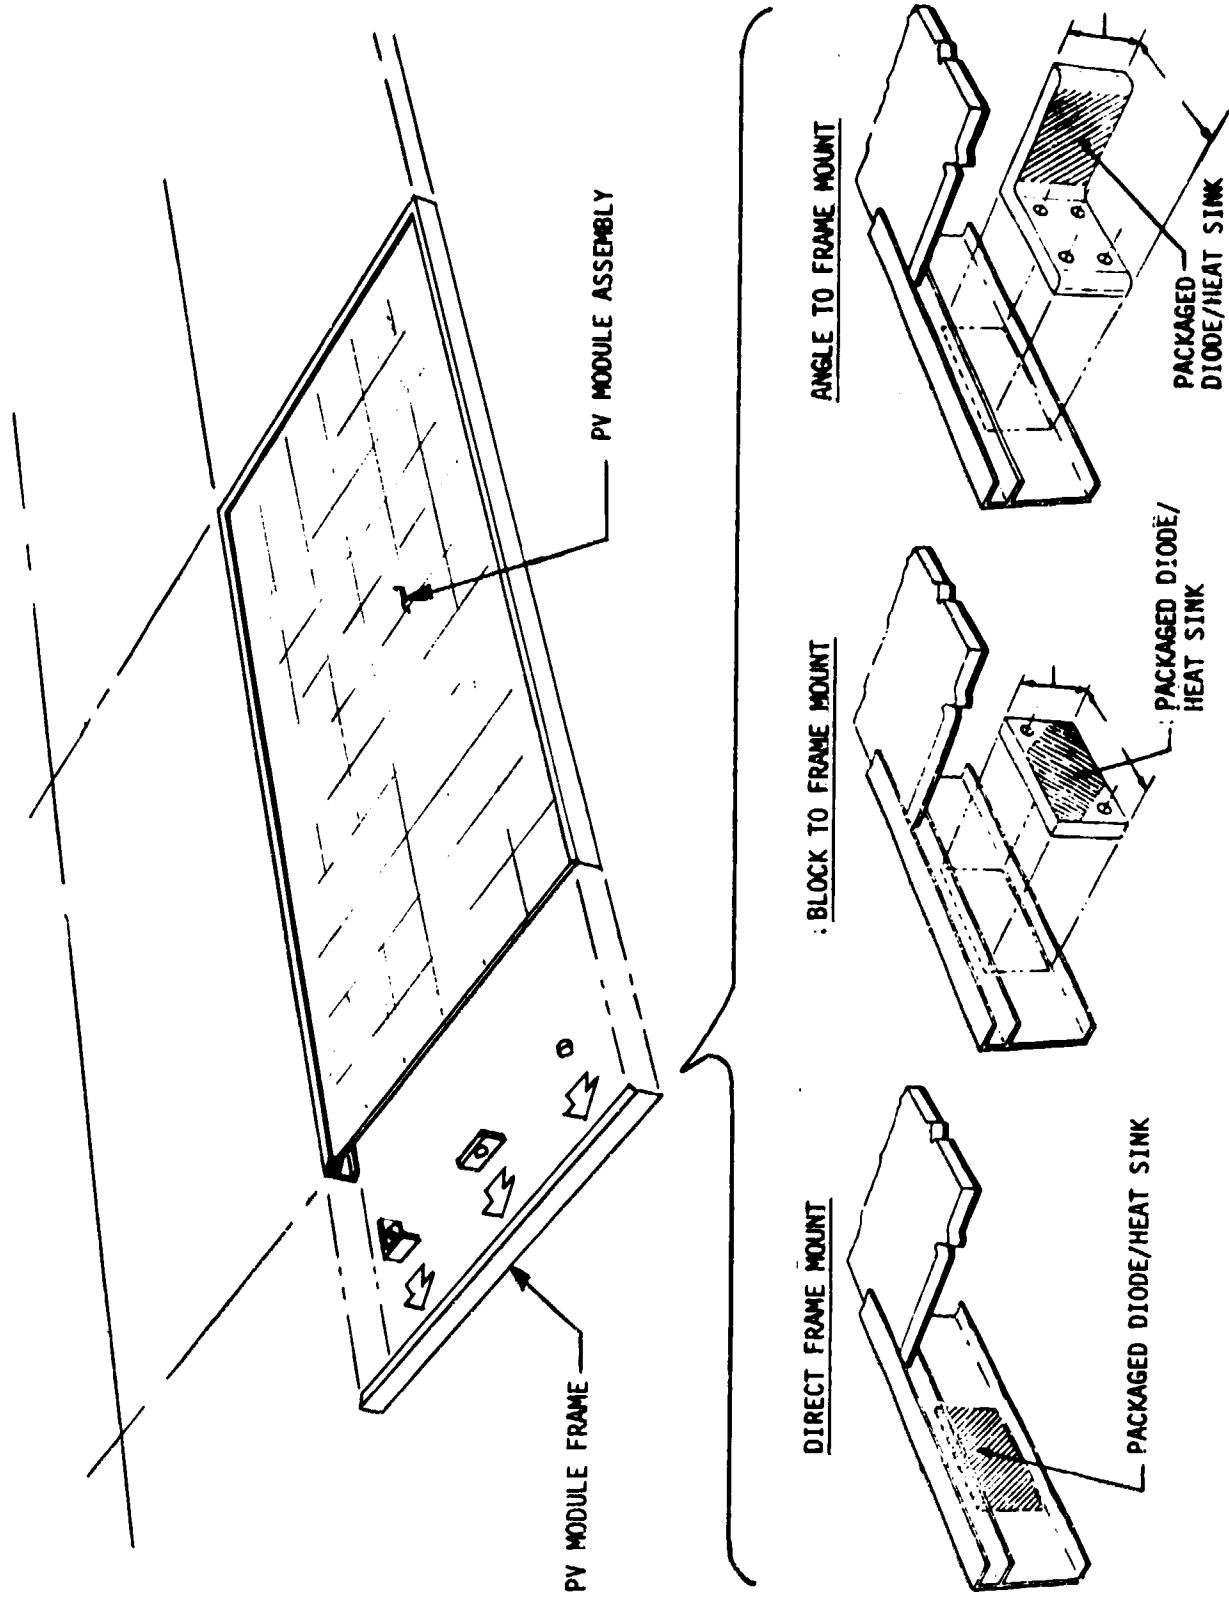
Packaged Diode/Heat Sink Mounted on PV Module Frame
